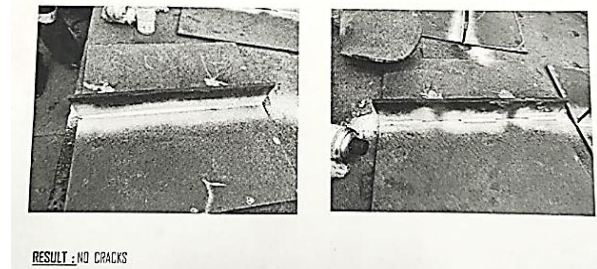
Sample of magnetic particles examination test for welded specimens with continuous (left) and intermittent chain (right) fillet welding
